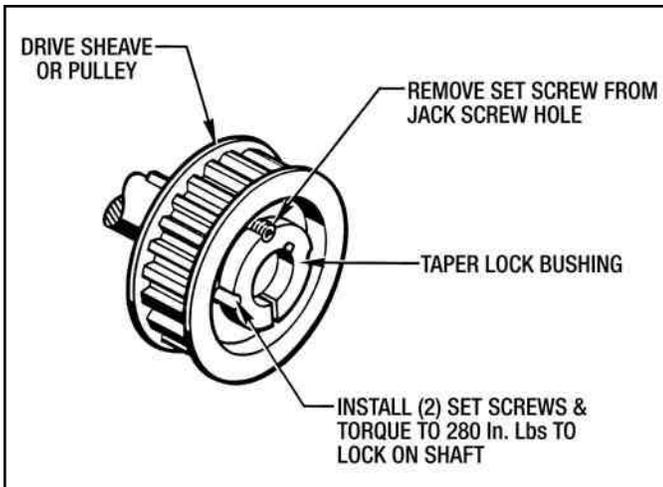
Installing Drive Sheave or Pulley With Taper-Lock Bushing
